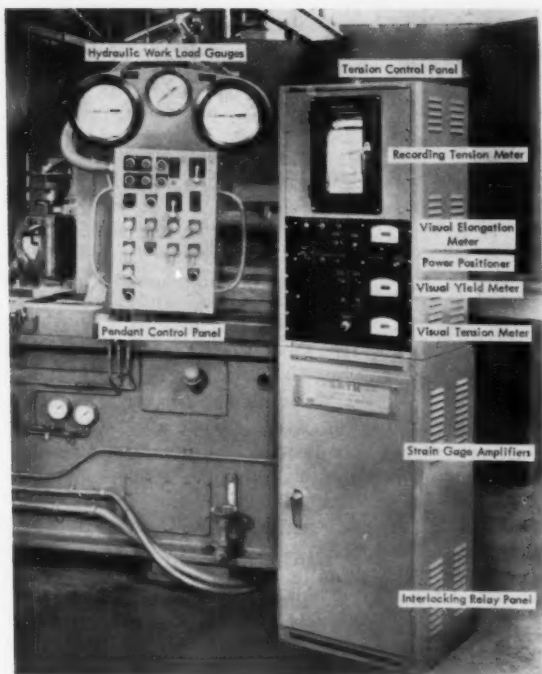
Control panels of Cyril Bath radial draw-forming equipment shown in Fig. 1
